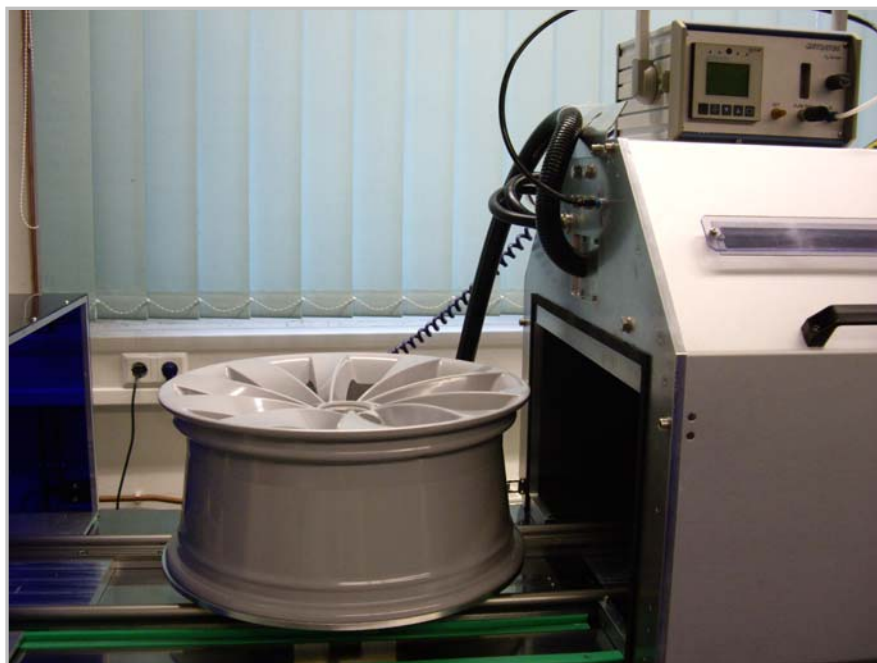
The rim is in the starting position. It will then be turned towards the right in the inert chamber and positioned under the MBS-3D. After turning 180°, the rim is reversed out of the tunnel and can be removed.
